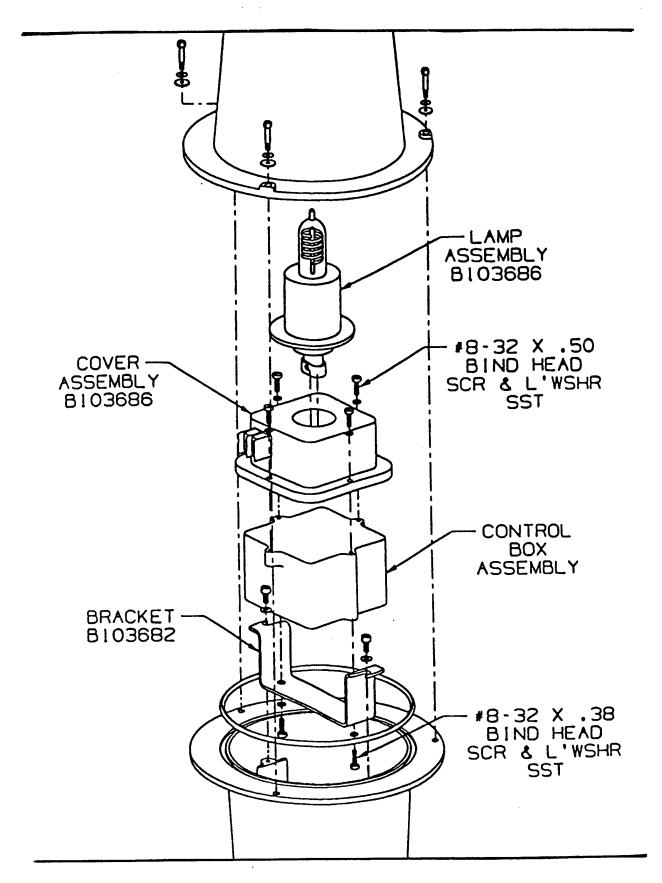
Exploded View of LE/Ar Lamp and Power Supply Assembly
